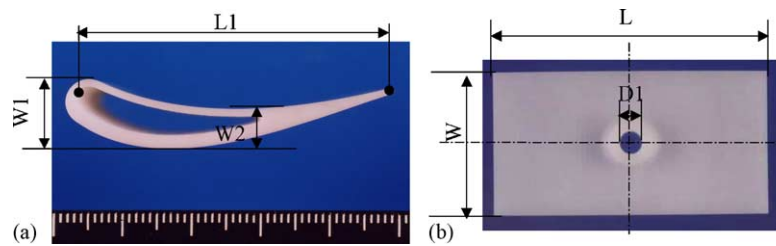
Samples of the MGC gas turbine components: (a) hollow-type turbine nozzle vane and (b) heat shield panel for a combustor liner.
